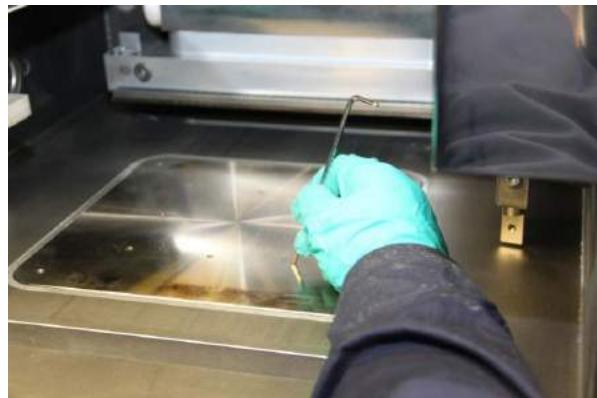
Prod bolt holes to loosen compacted powder and then vacuum
